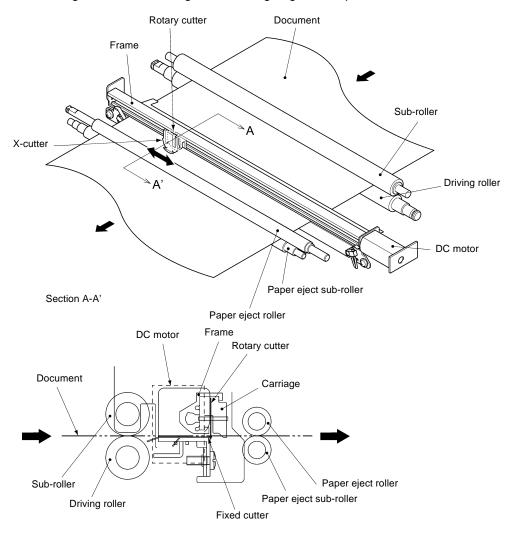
Cutting Leading and Trailing Edges (X-cutter Mechanism)
